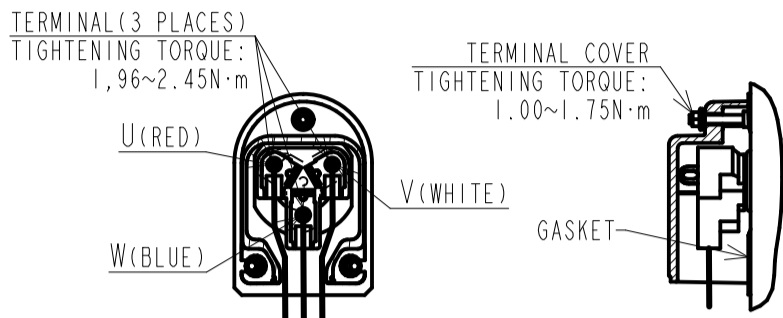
CONNECTING DETAIL OF COMP WIRING
